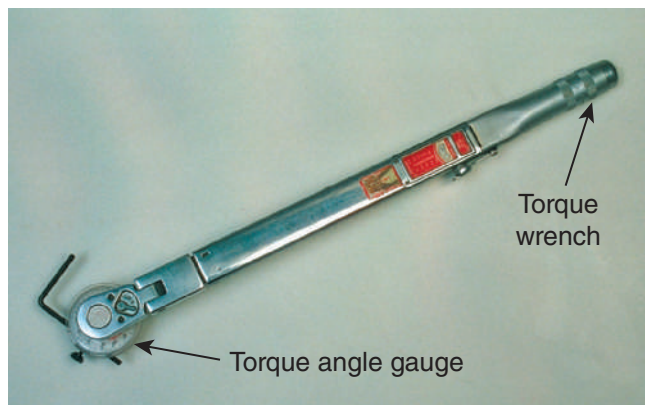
A torque angle gauge attached to the drive lug of a torque wrench.
